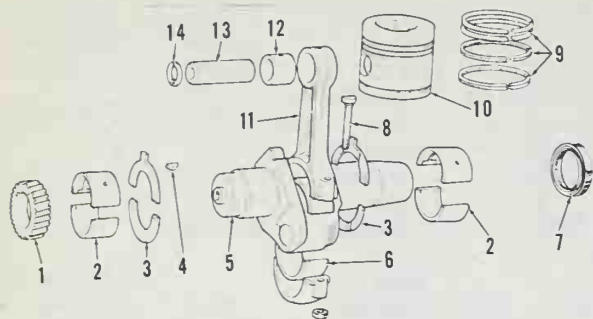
Exploded view of crankshaft, connecting rod and piston.
